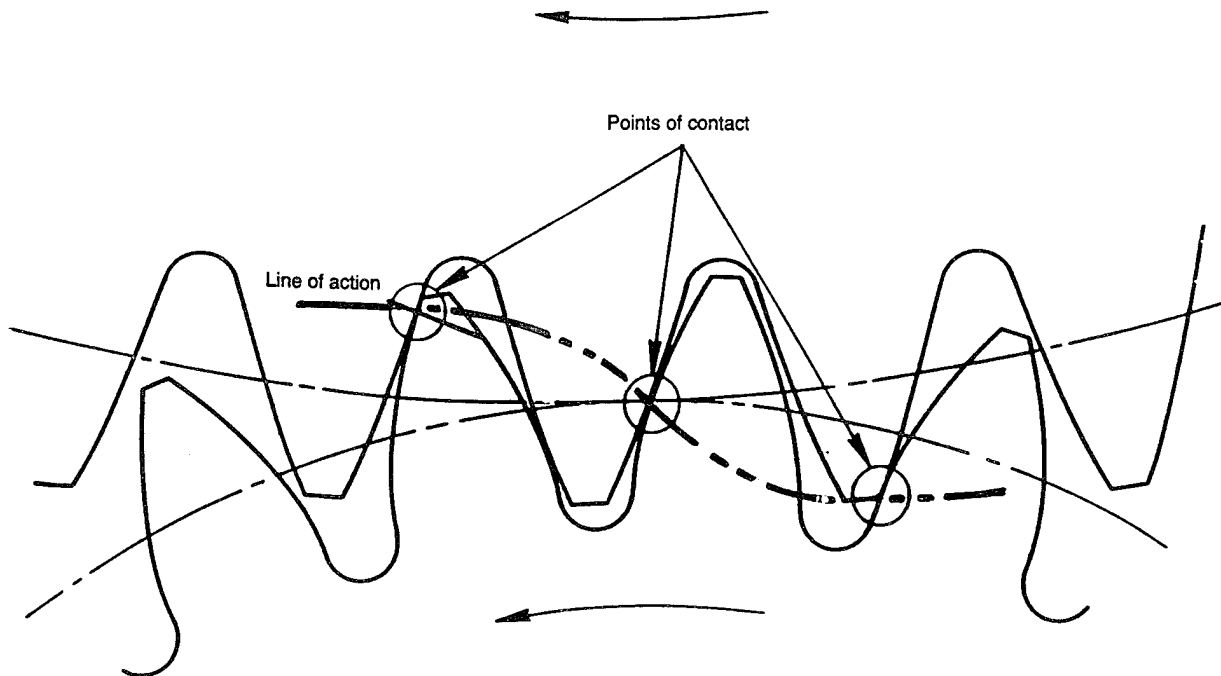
Spur Gears With High Contact Ratio, Noninvolute Tooth Form
